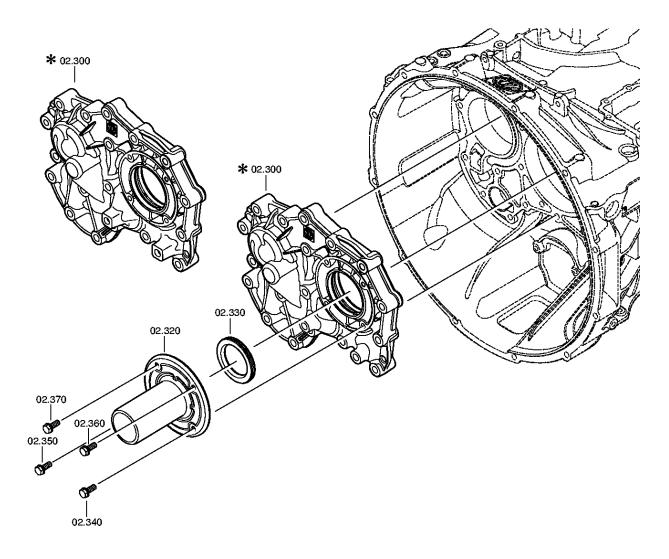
INPUT SHAFT 16 S 2531 TO / INPUT SHAFT
